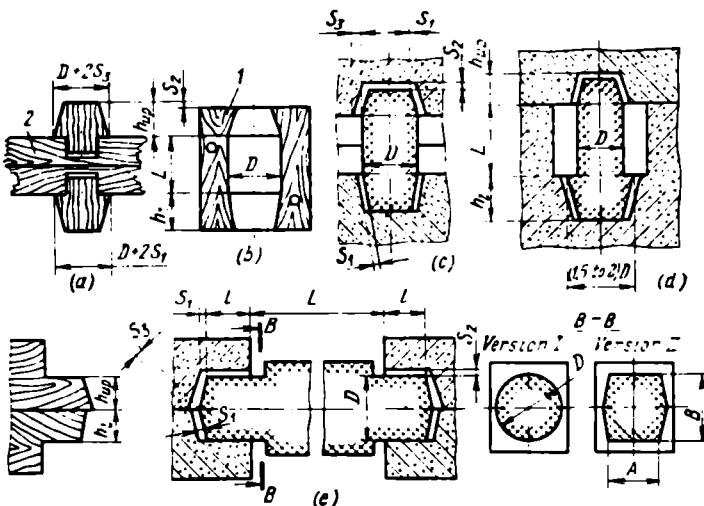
Dimensions of vertical and horizontal core prints of cores
